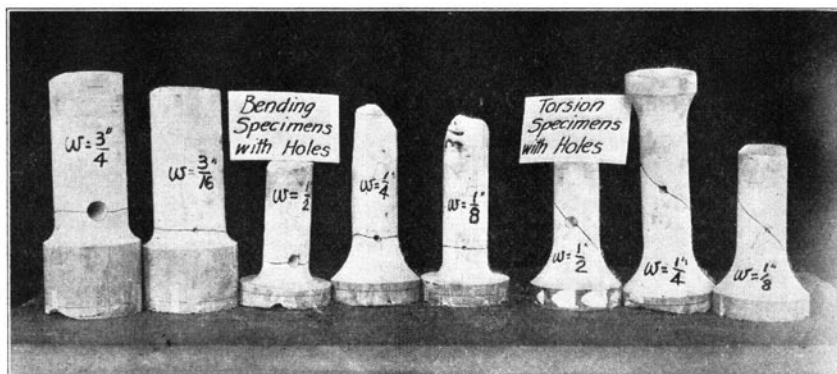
VIEW OF SOME OF THE BROKEN SPECIMENS WITH HOLES
